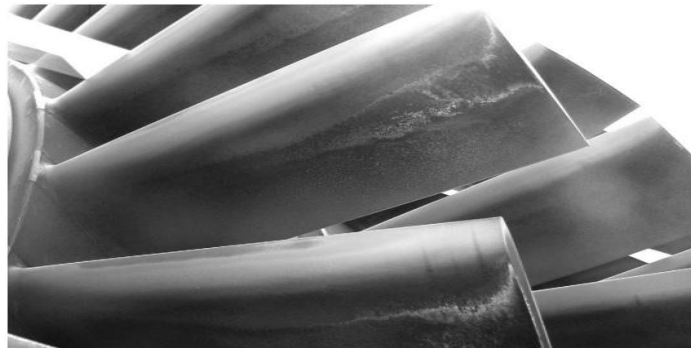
Deposits on a Compressor Rotor Blades, (Fouling) [13]
